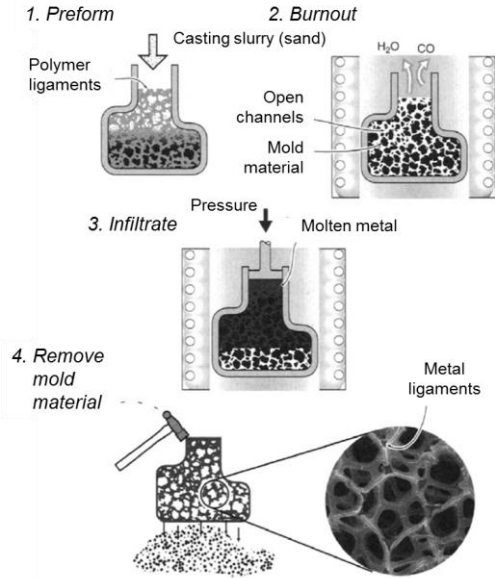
Investment casting method used to manufacture open cell foams (DUOCEL process)[3]
